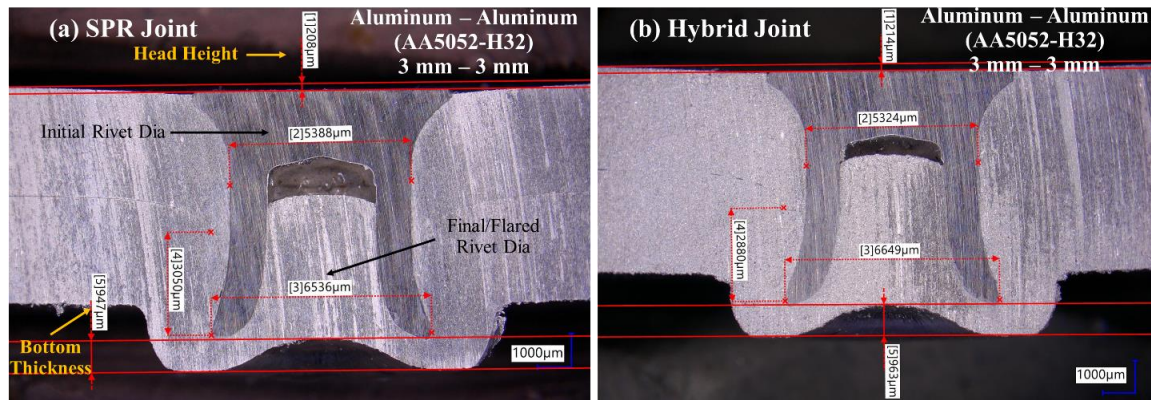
Cross-sectional imaging of SPR (a) and hybrid joints (b) made with 3 mm-thick aluminum AA5052-H32 alloy, showing the measured physical attributes.
